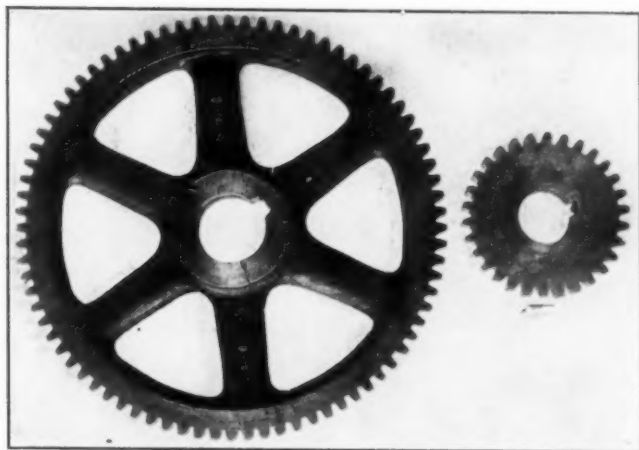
30 TOOTH ENGAGING 80 TOOTH, TEST 45, SERIES 2. GERMAN HEXAGONAL KEY USED IN 80 TOOTH
